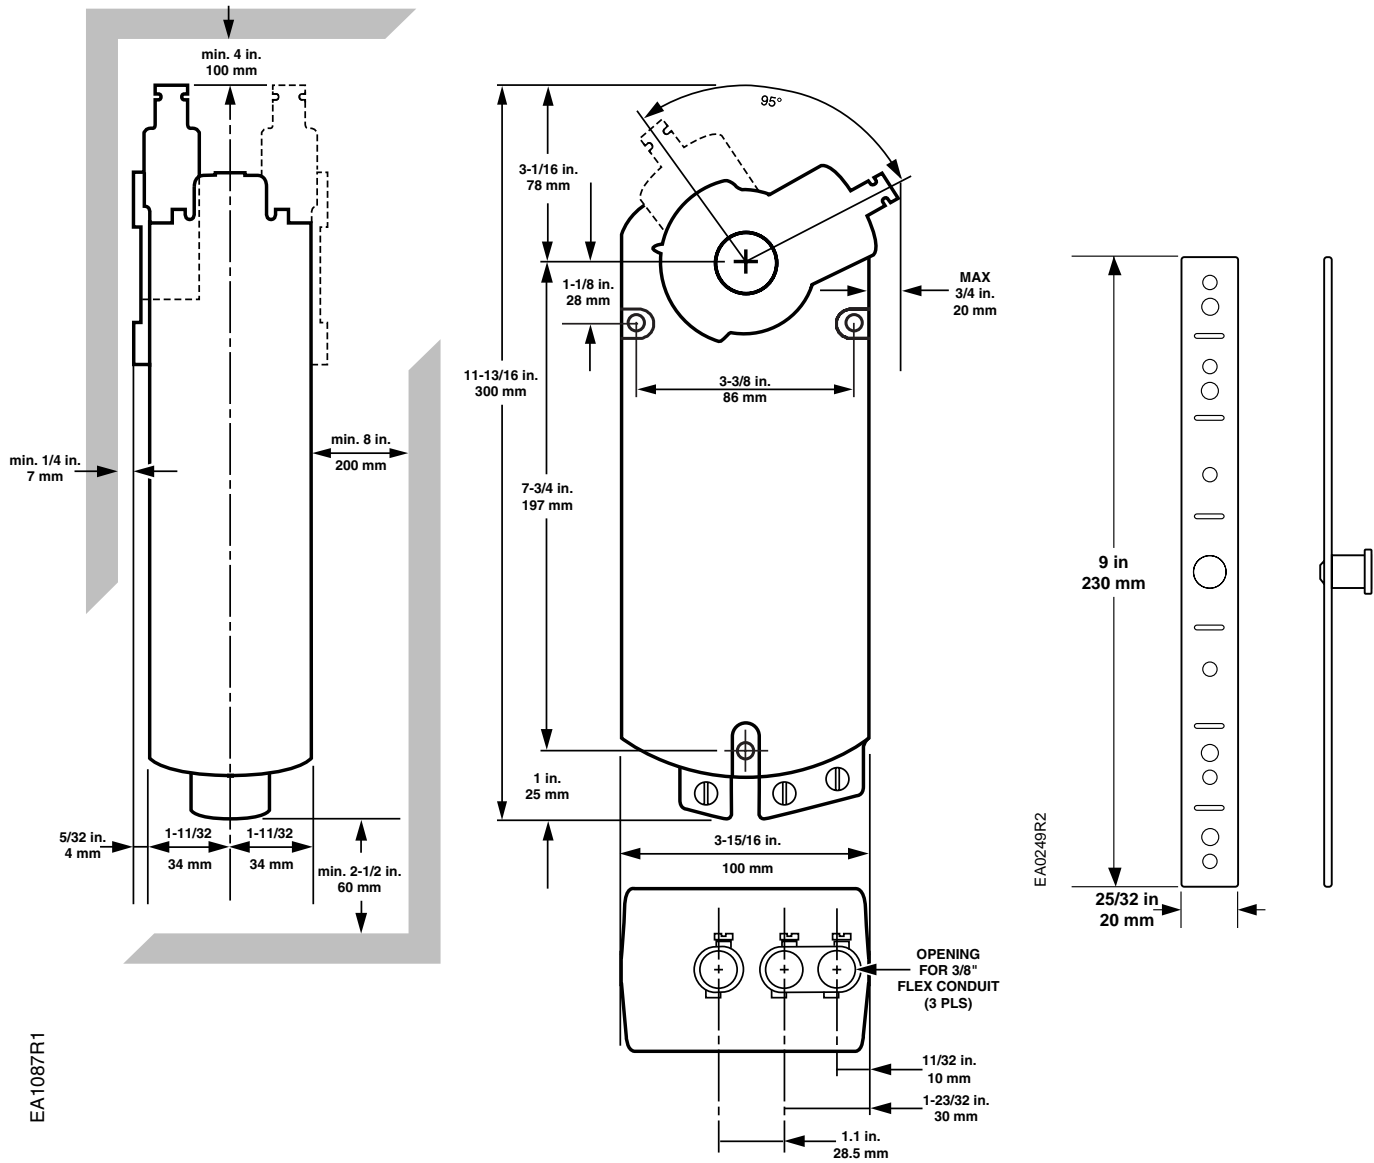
Dimensions of the GCA Actuator and Mounting Bracket.
